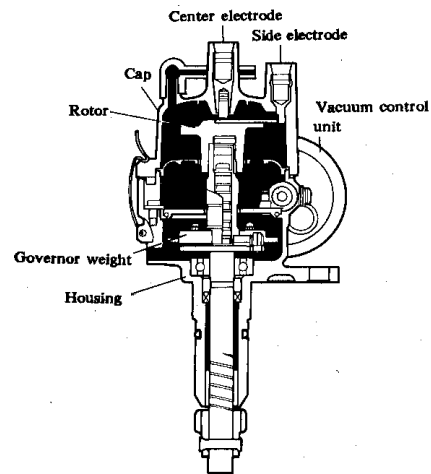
shows the distributor unit in section to expose its internal mechanisms to easy viewing. The shaft is driven from engine crankshaft through worm gearing, and rotates once for every two revolutions of the crankshaft.
